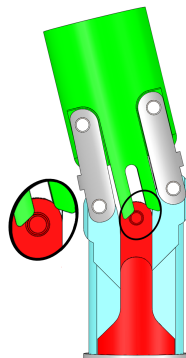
Section and detail view of sloping corners to ease assembly.
